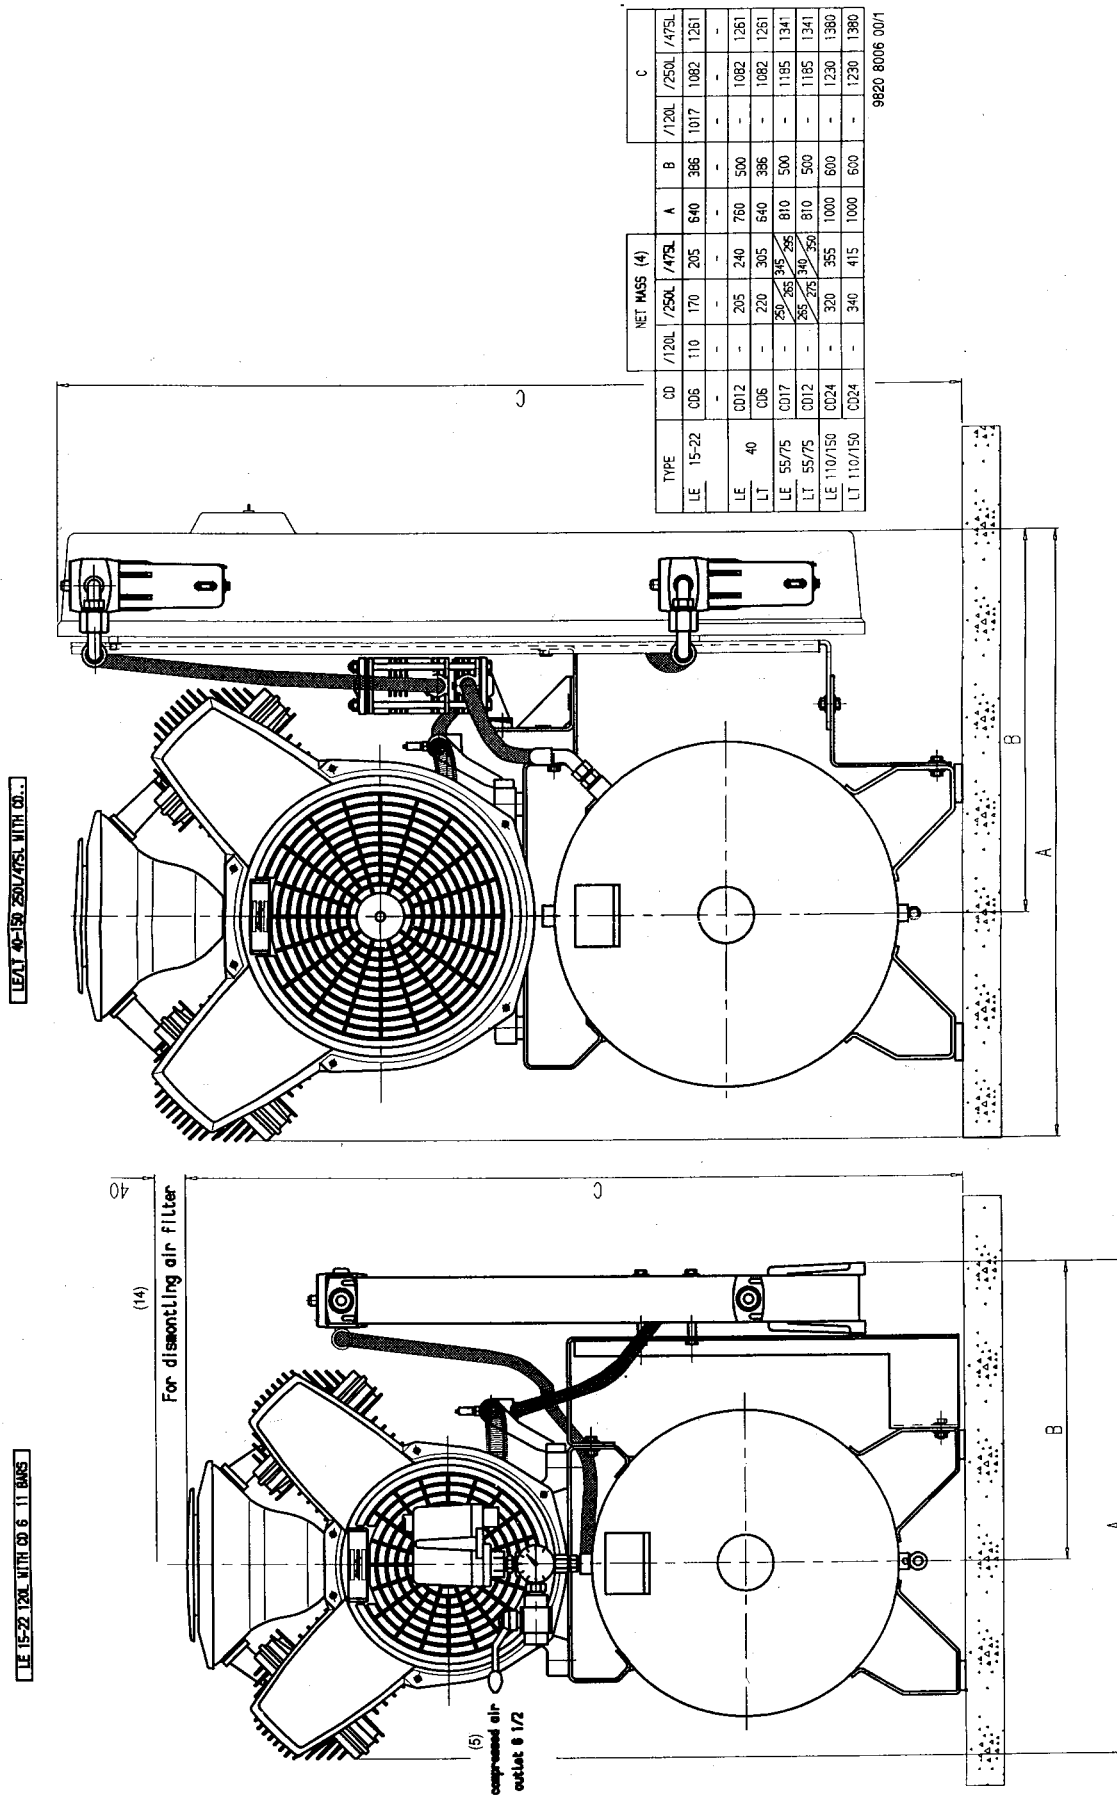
Dimension drawing, LE/LT15 up to -150 with CD dryer
